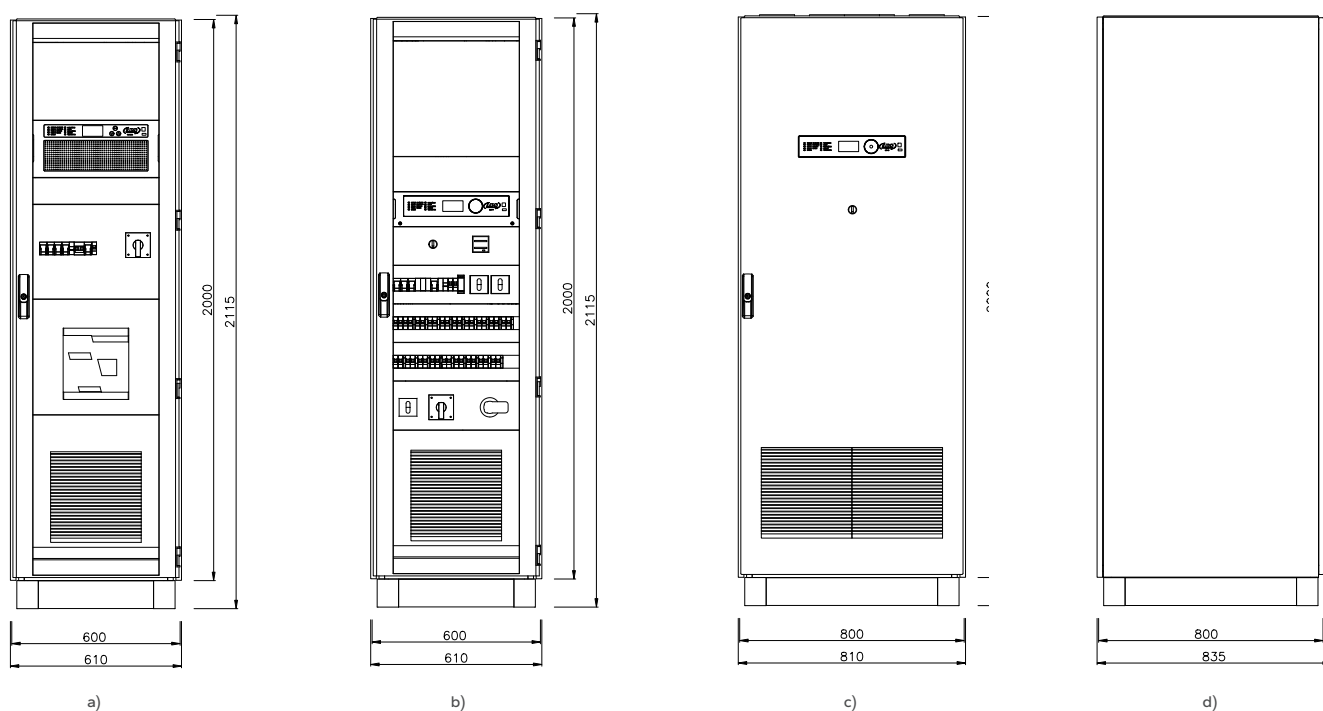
Views with dimensions of the BF1z / BFI type inverter cabinet:
